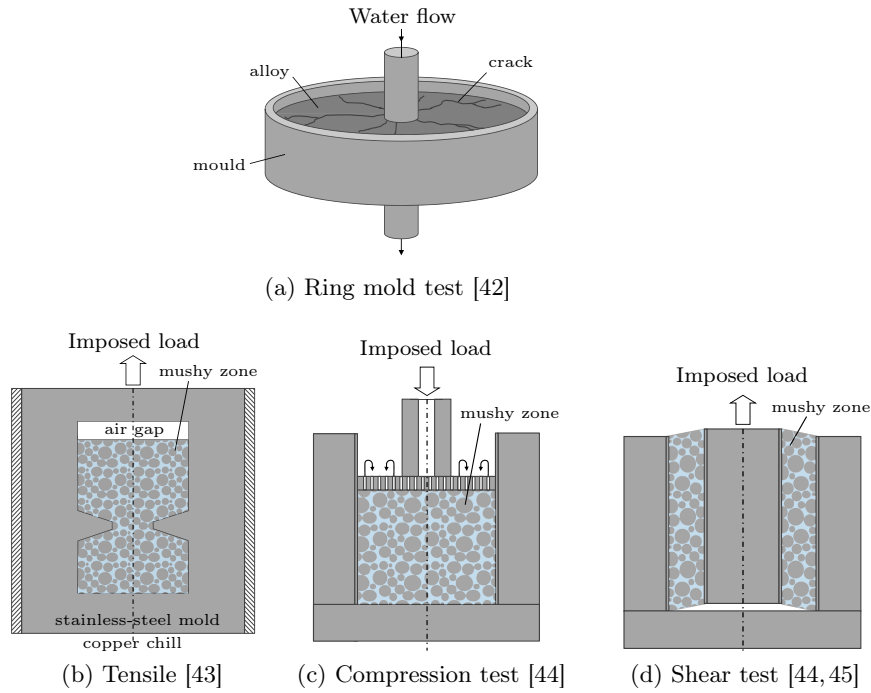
Schematic drawings of (a) a ring mould test as well as (b)-(d) some of the common devices used to perform mechanical tests on mushy zones.
